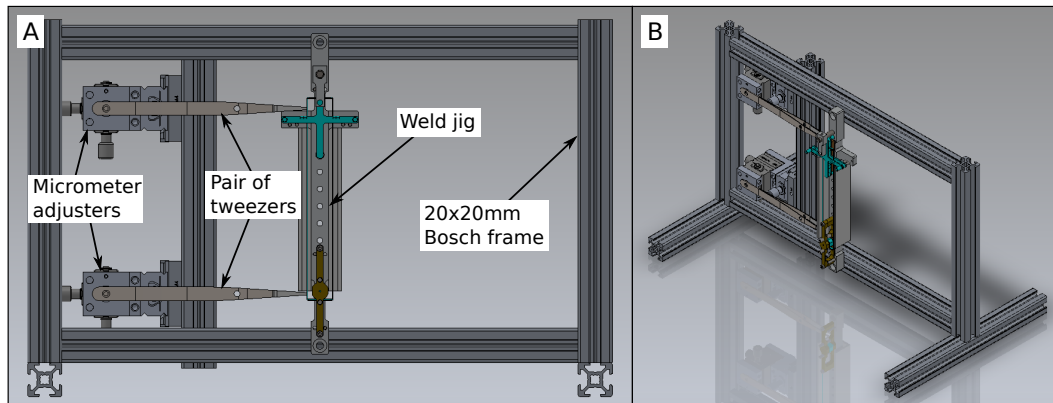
Computer-aided-design model of the weld tool. In Picture A the weld tool together with the weld jig is shown in a front view. The weld jig is mounted centrally in the weld structure. The two 3-axis micrometer adjusters are mounted on an additional piece of Bosch extrusion that is also mounted to the weld structure. A pair of tweezers is used to hold the fibre that can be aligned with the micrometer adjusters. Picture B shows an isometric view of the weld tool.
